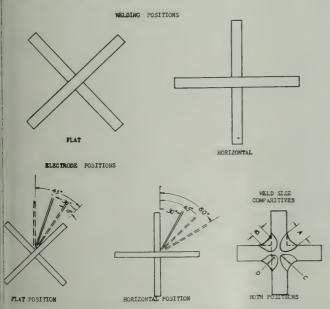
FIG. I—DIAGRAM of test procedure showing positions of work and electrodes, and the location of weld size measurements.
